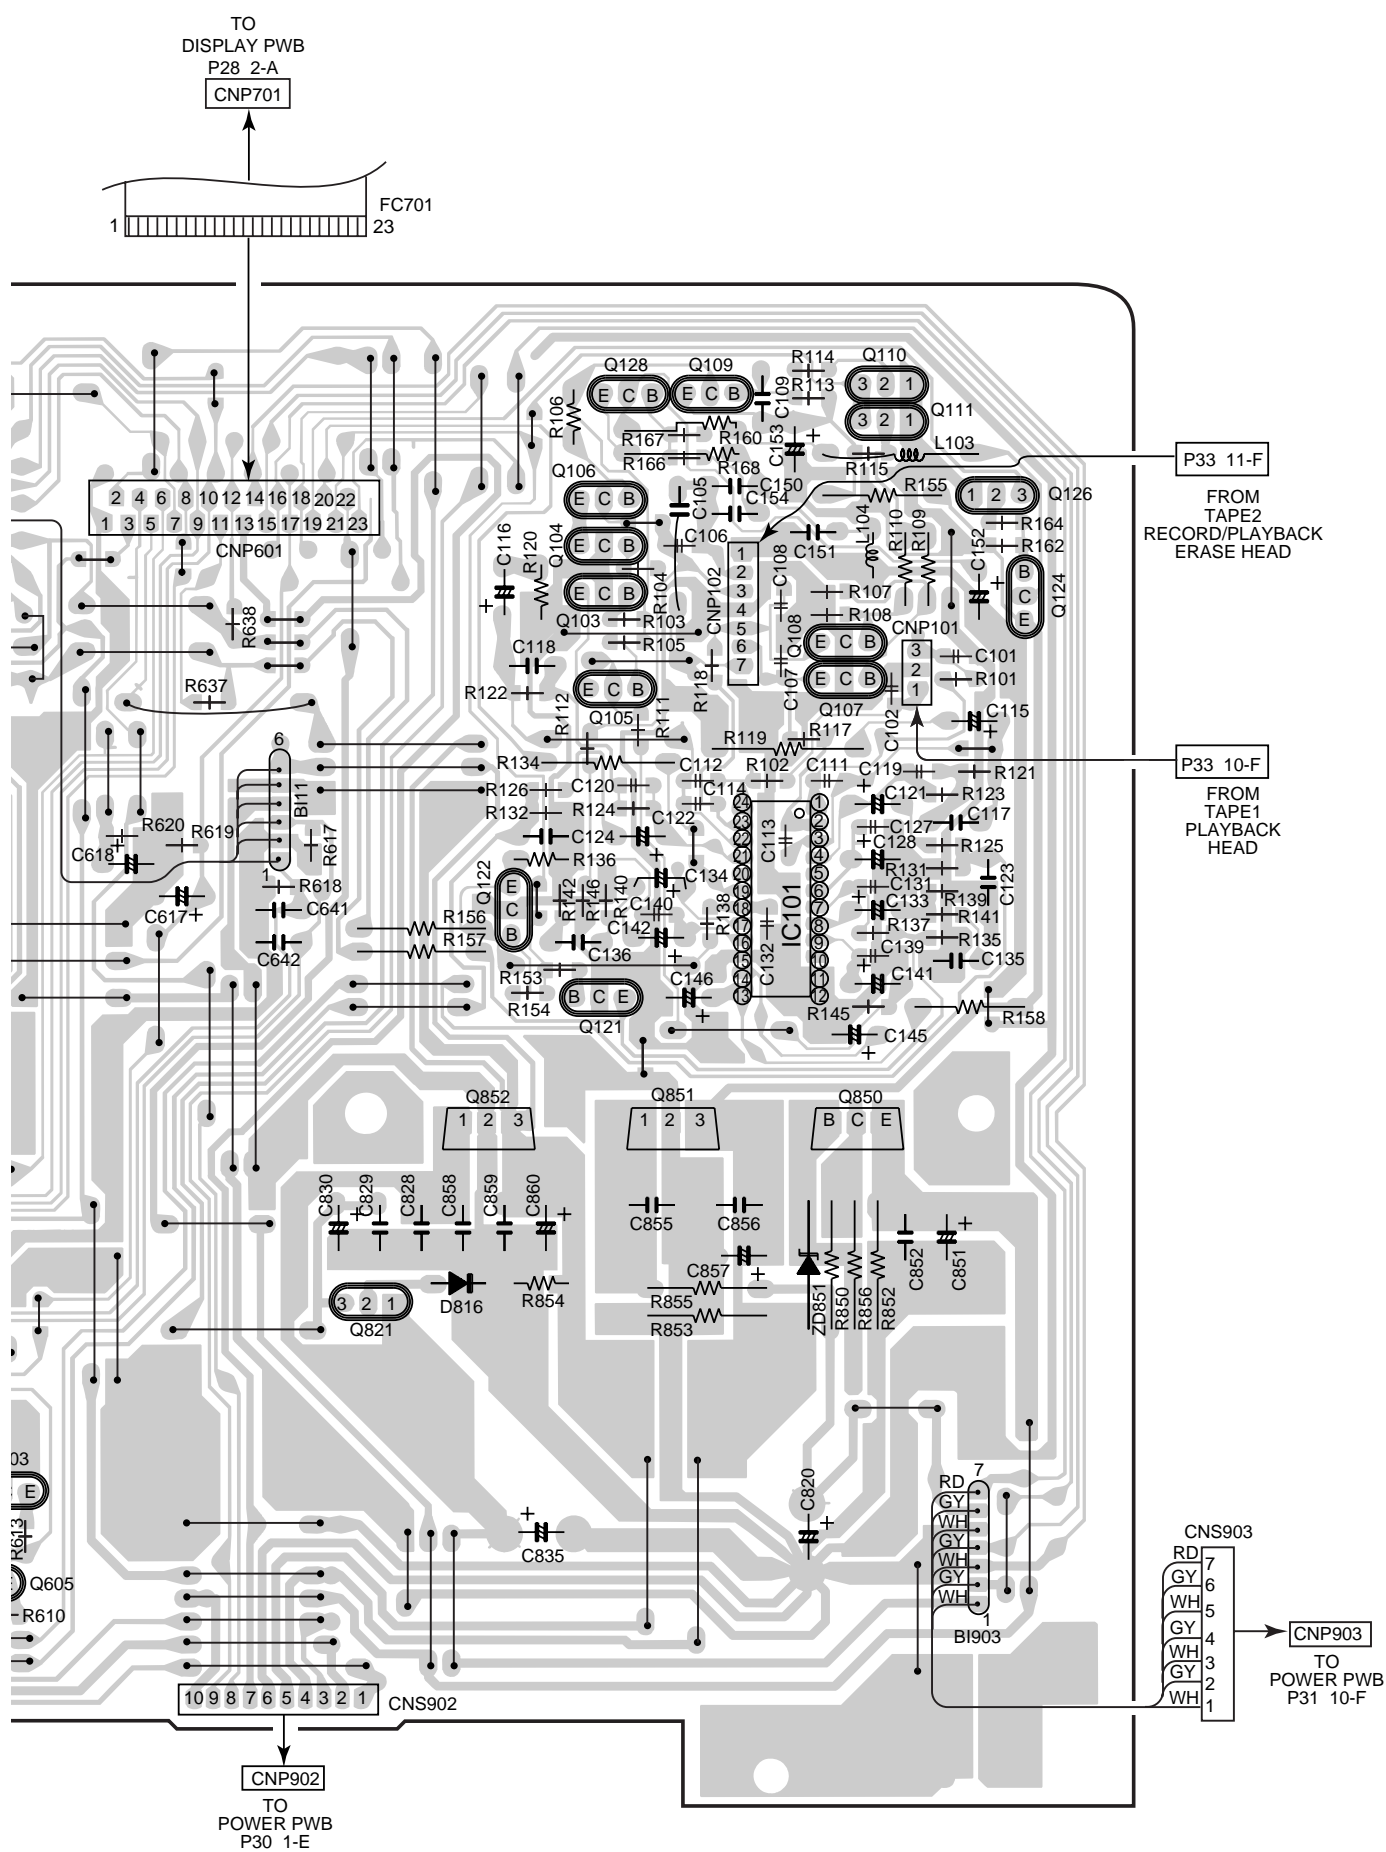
WIRING SIDE OF P.W.BOARD (2/8)
